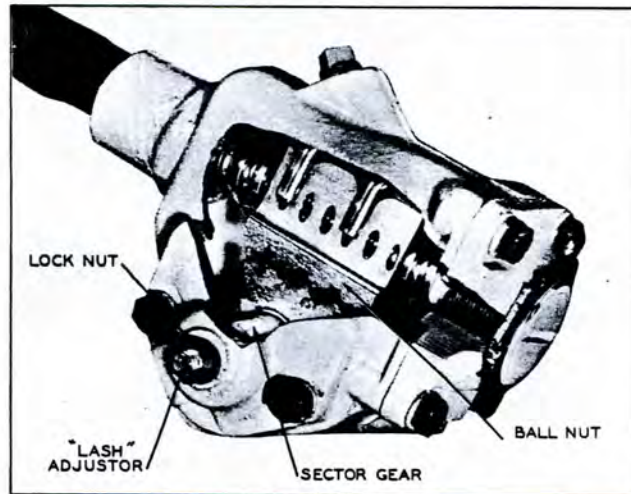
Steering Gear Lash Adjustment (Sector Gear)
